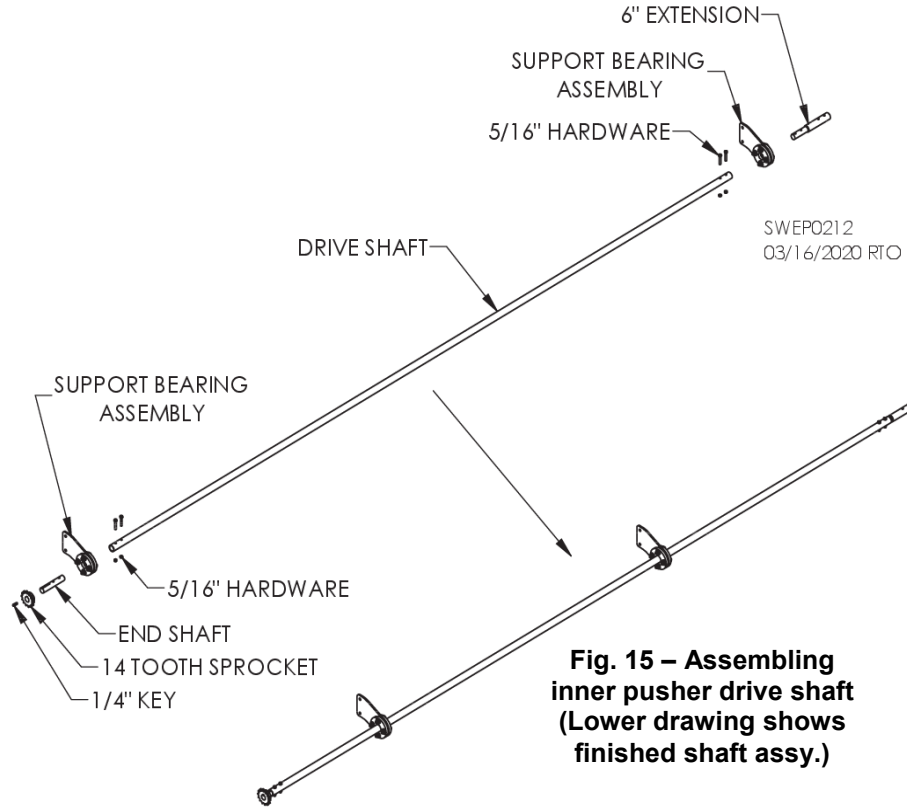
Assembling inner pusher drive shaft (Lower drawing shows finished shaft assy.)
